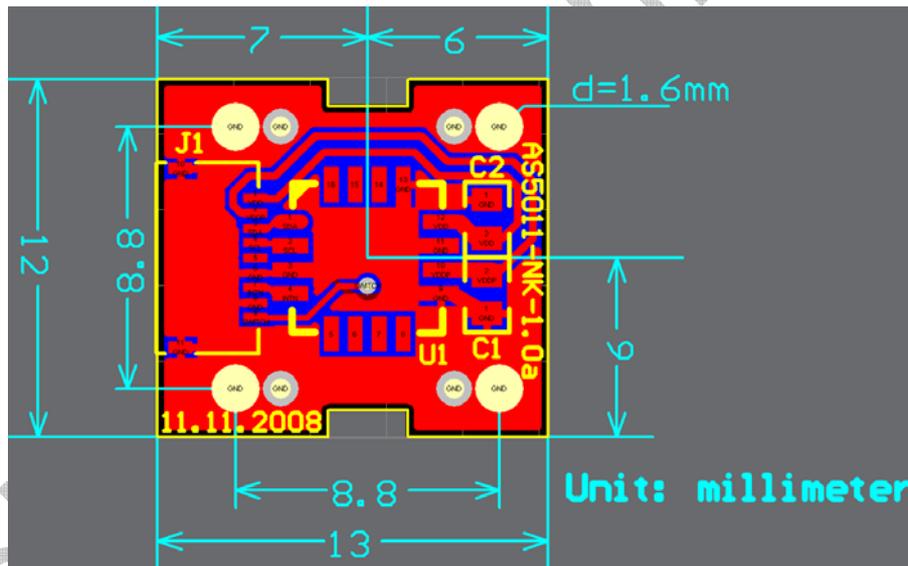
AS5011\_NK\_1.0 navigation module PCB, bottom view
